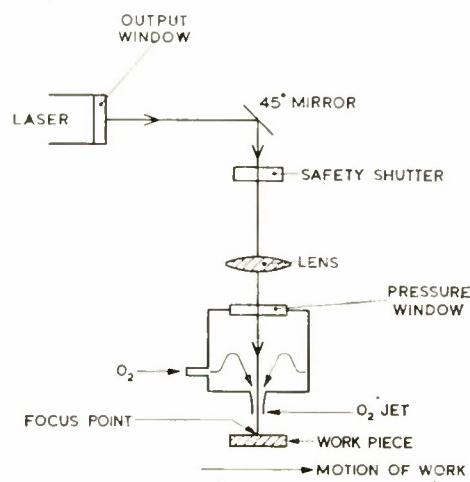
General arrangement for gas-jet laser cutting, showing optical system and oxygen chamber.
